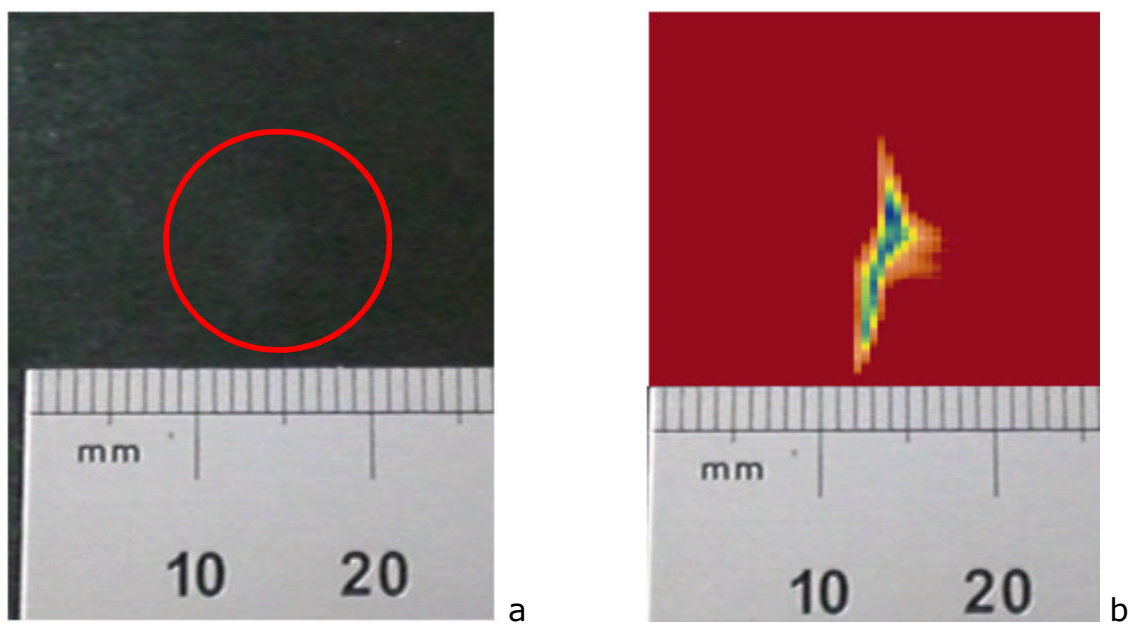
PA66-i-GF35 plate impacted at 4 J, visual inspection (a), C-Scan image (b)
